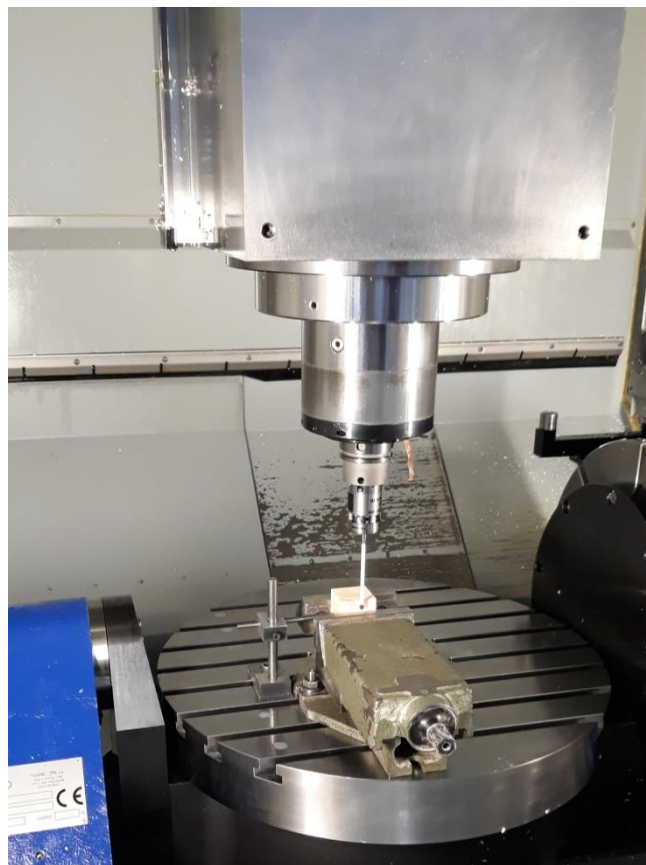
Setting the workpiece zero point with a built in probe RENISHAW.
